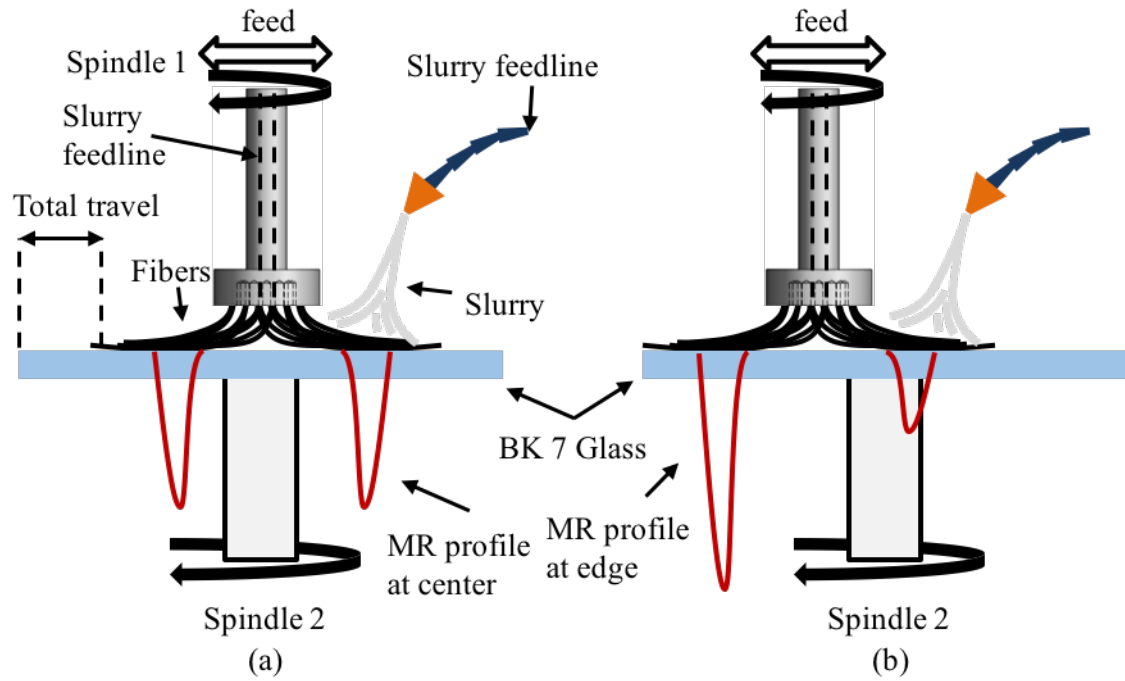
Spiral raster polishing configuration and MR profile change with tool position (a) tool at center (b) tool at the edge
